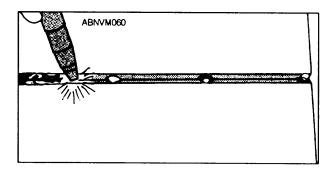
Moving the welding gun forward at the proper angle.
